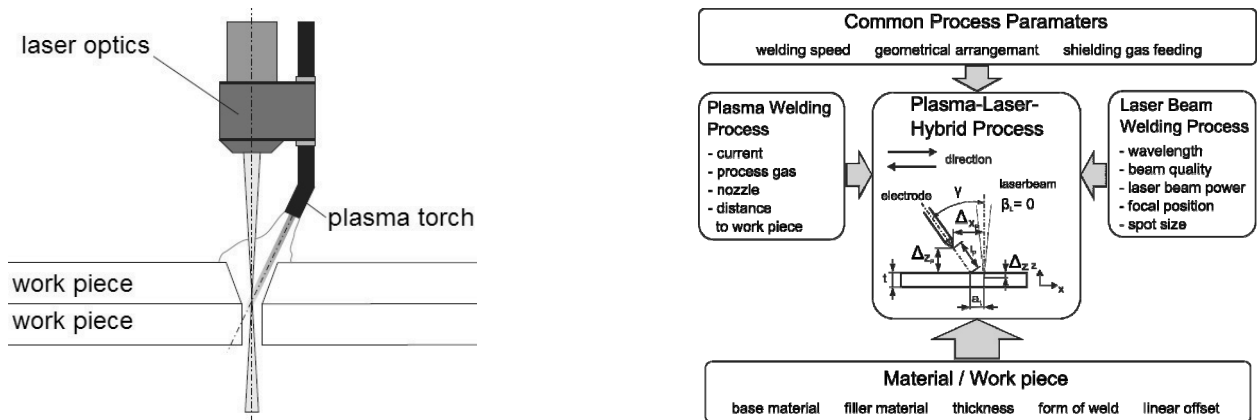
(a) arrangement of machinery; (b) actuating variables of plasma-laser-hybrid welding process [1]
